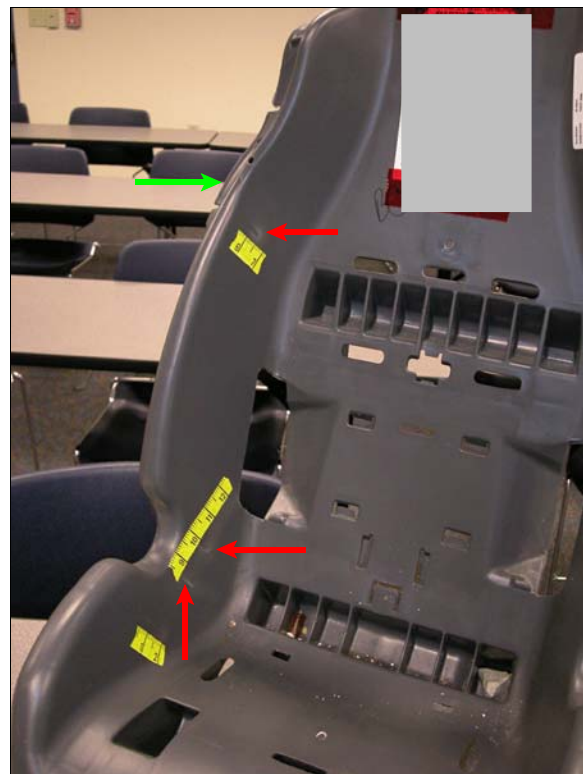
Red arrows show location of stress marks near belt guides, green arrow shows location of lower shoulder belt guide on right side of seat
